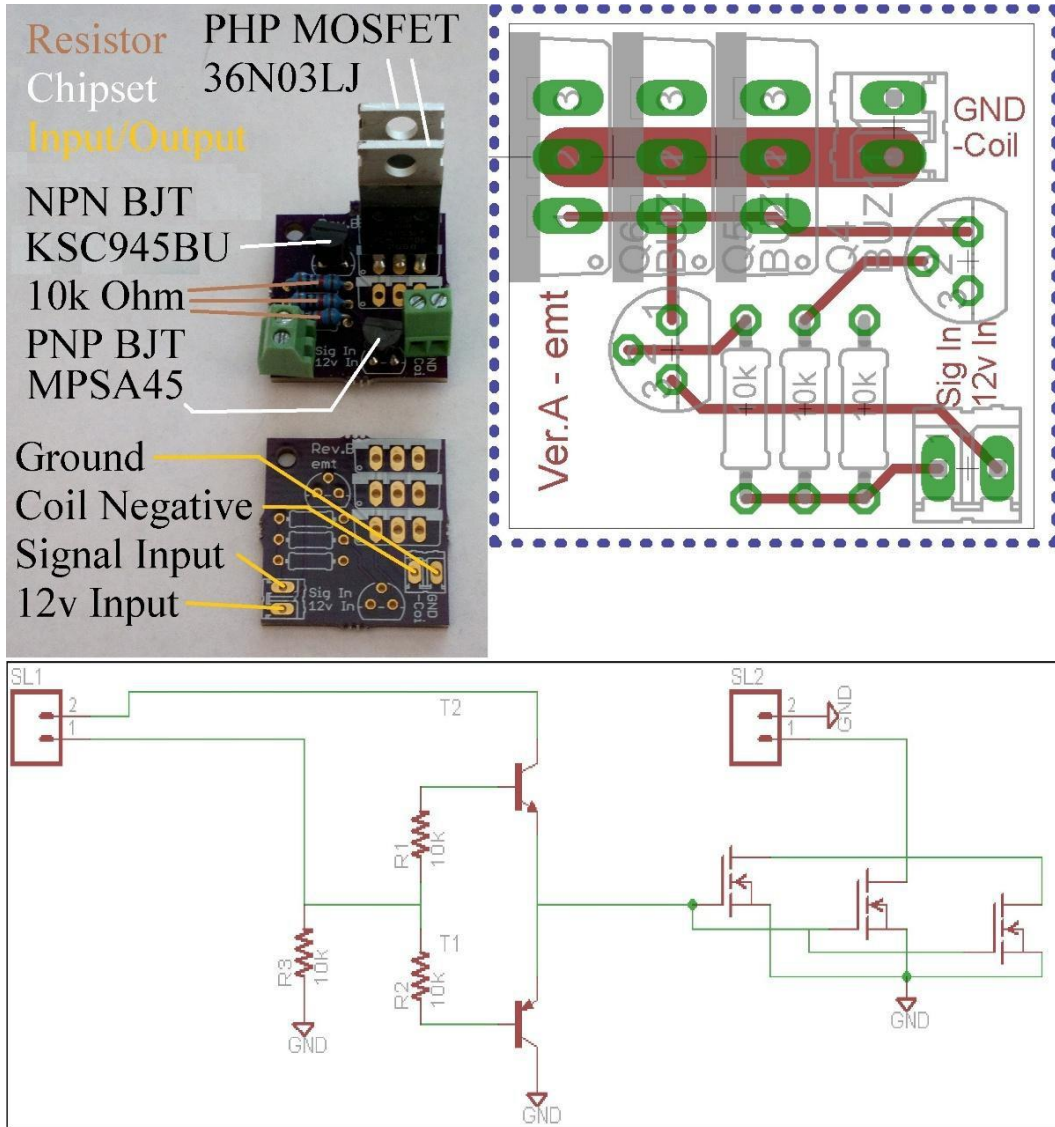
PWM switch circuit details. Populated board, bare board, board layout, and schematic.
